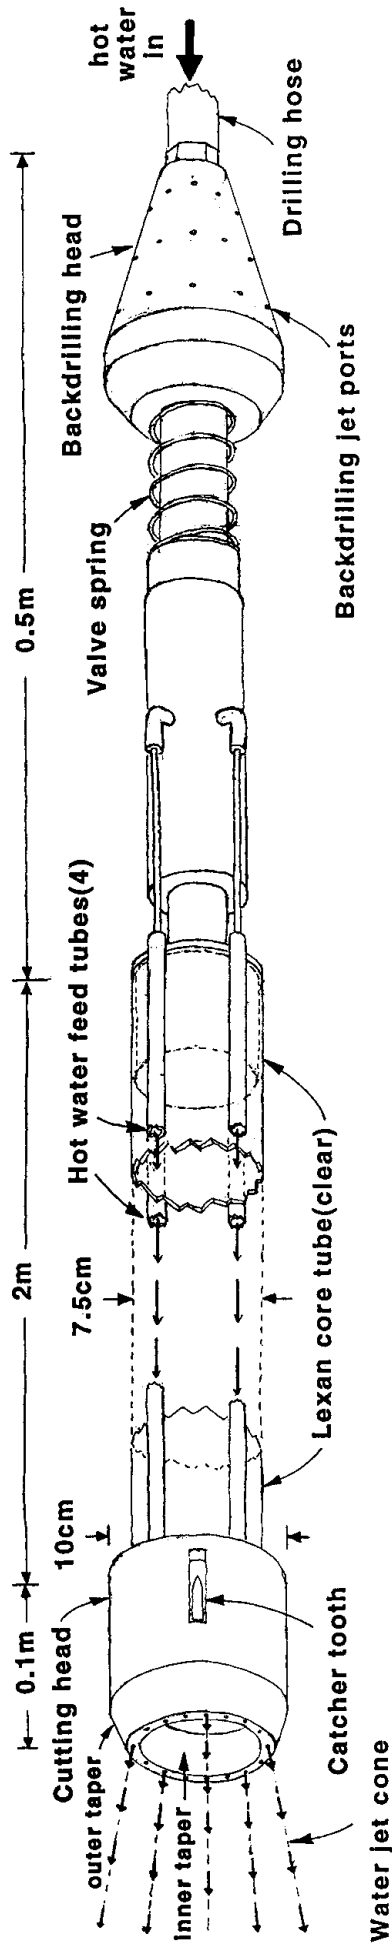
Complete assembly of hot-water ice-corer for 70 mm diameter ice cores.
